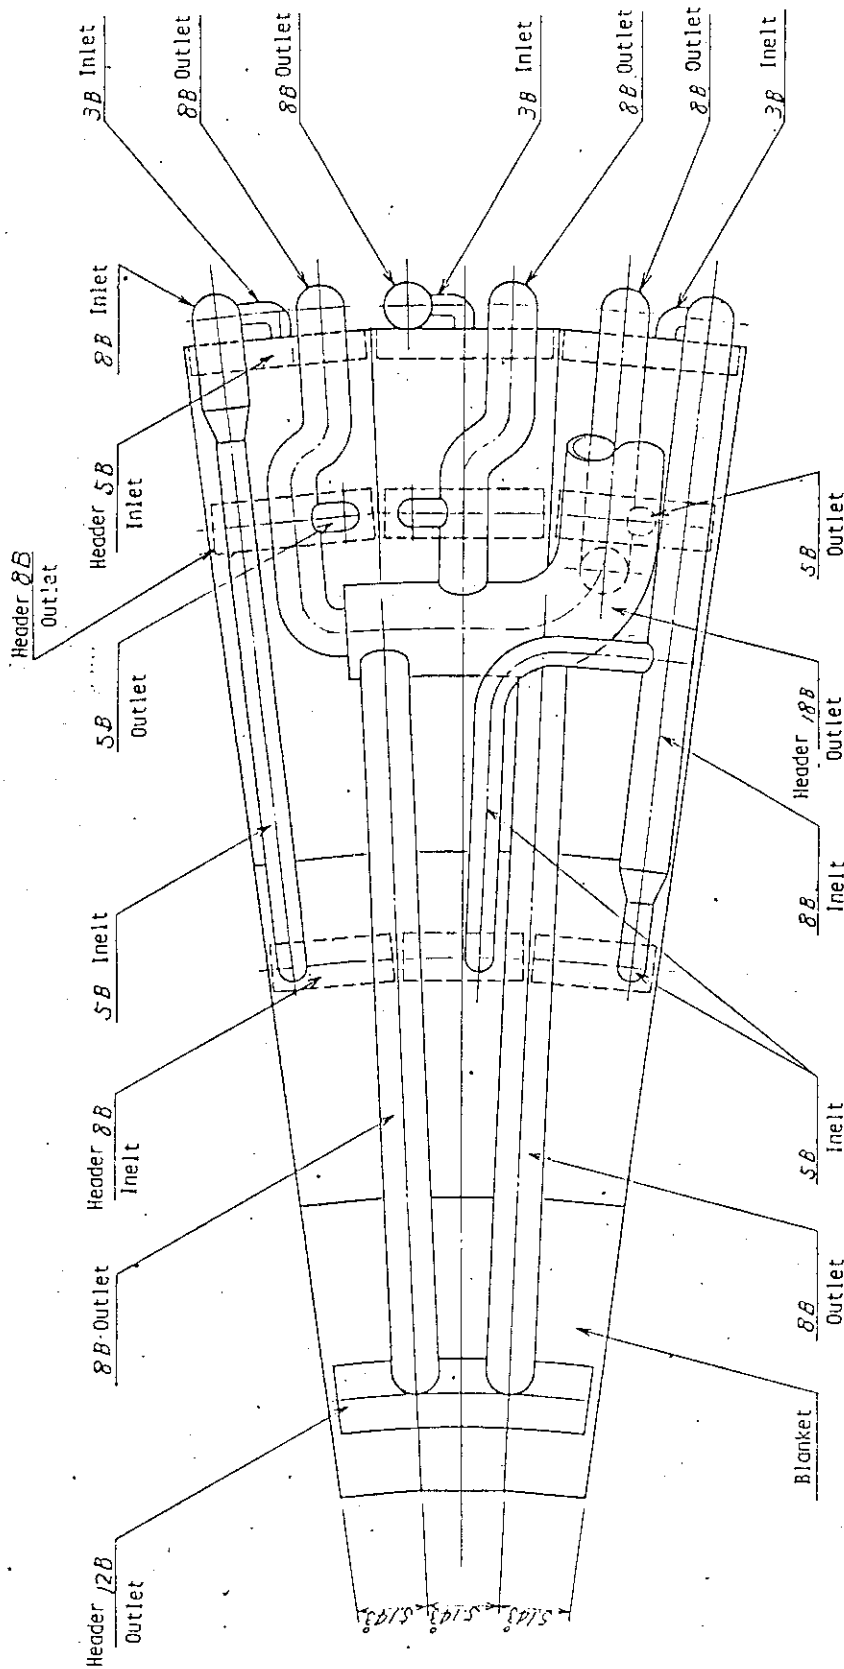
SPTR Power Plant (Plane View of Blanket Piping (Upper) ... 3 Blanket Type)
